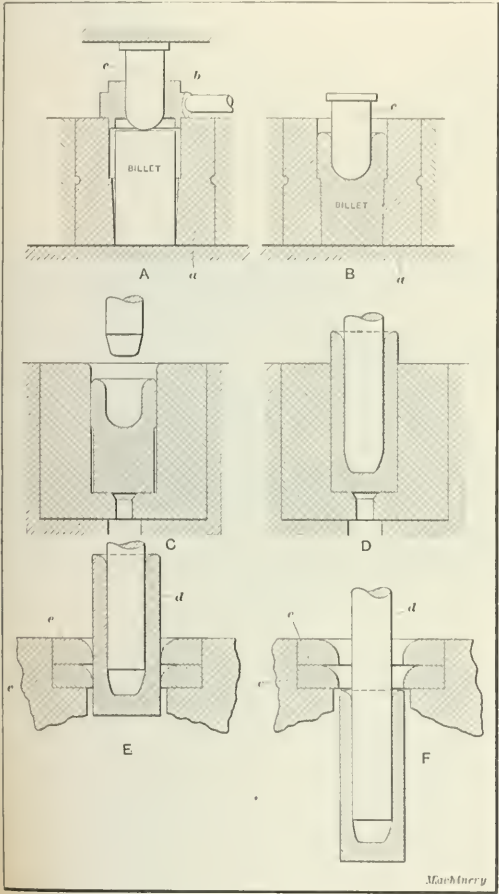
Three-operation Method of making 4.5 British High-explosive Shell Forgings
